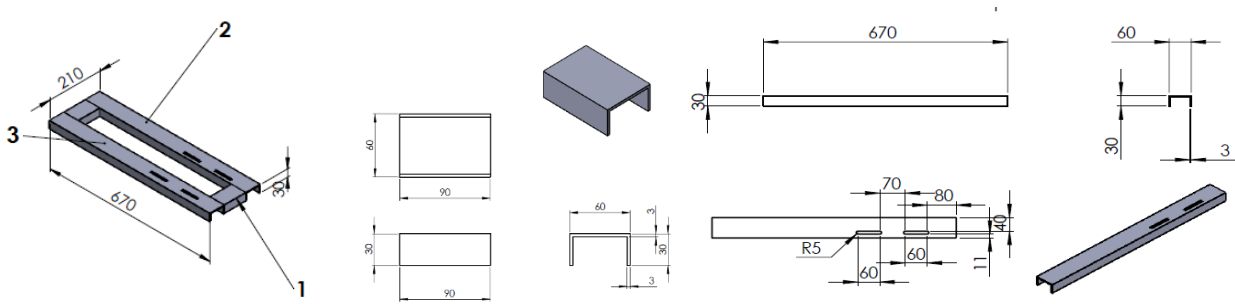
Mounting stand subassembly for the pelletizing equipment
